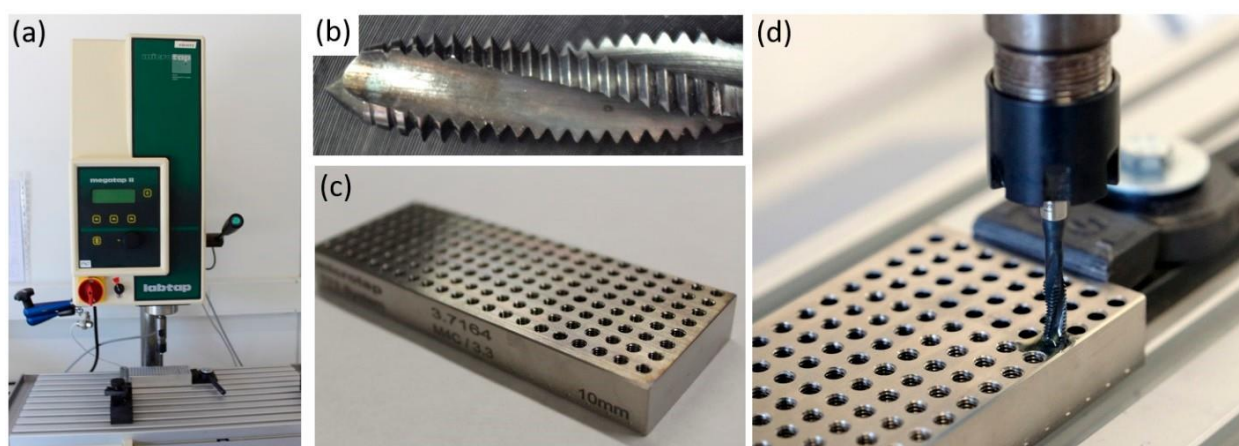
The experimental setup to study the lubricity performance using the Labtap G8: (a) Labtap G8 equipment, (b) TTT_M4C coated tool, (c) Ti6Al4V workpiece and, (d) cutting process.
